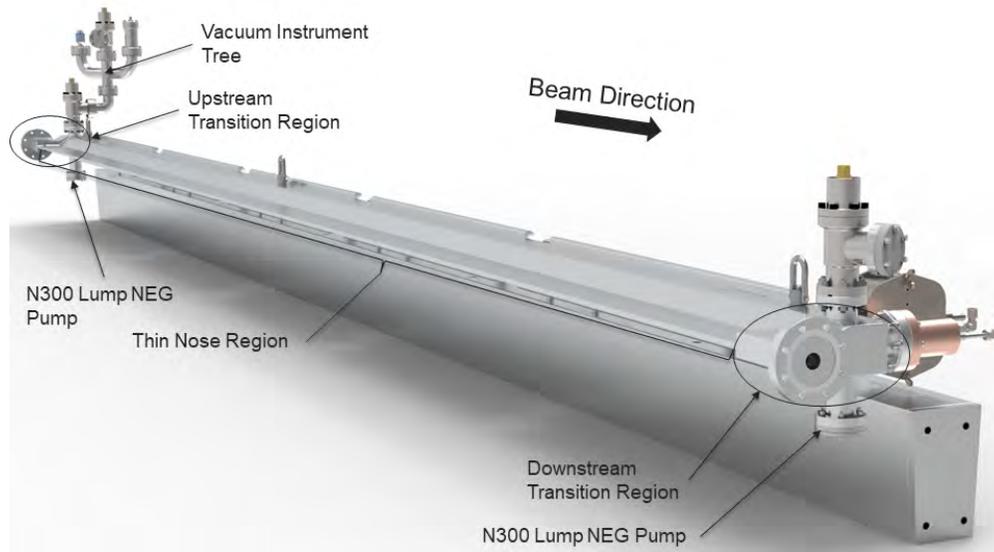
Planar Insertion Device Vacuum Chamber Assembly inboard view
